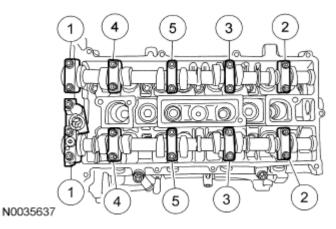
Identifying Camshaft Bearing Cap Bolts Loosening Sequence Courtesy of FORD MOTOR CO.
